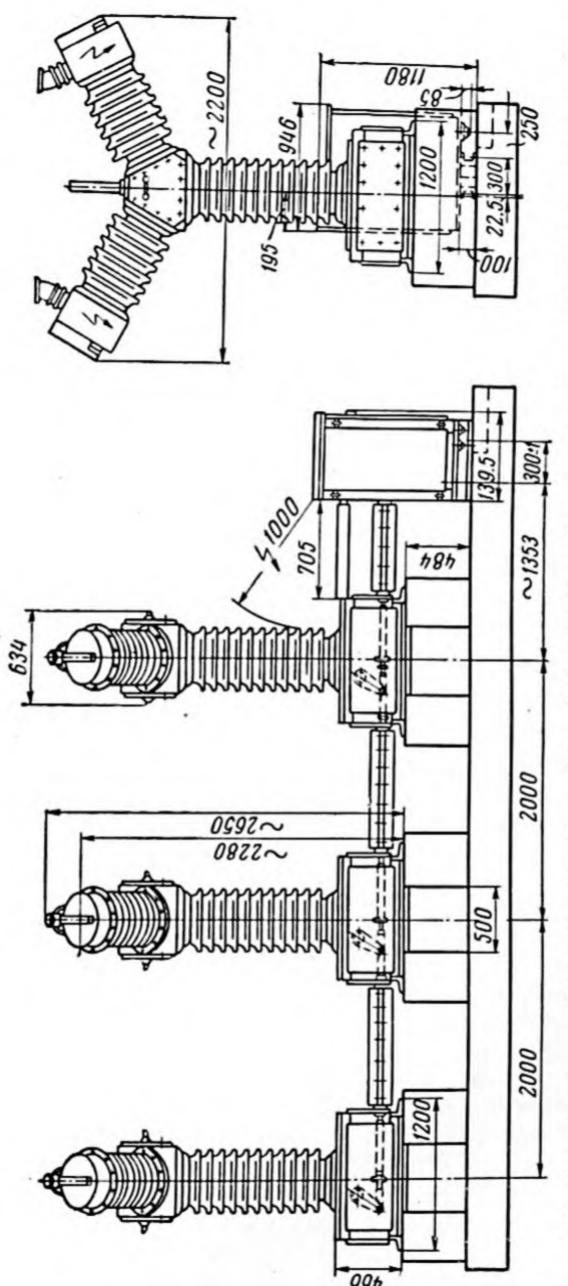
General view and installation dimensions of the MF-110 oil circuit breaker and IIIIC-30 solenoid operating.
